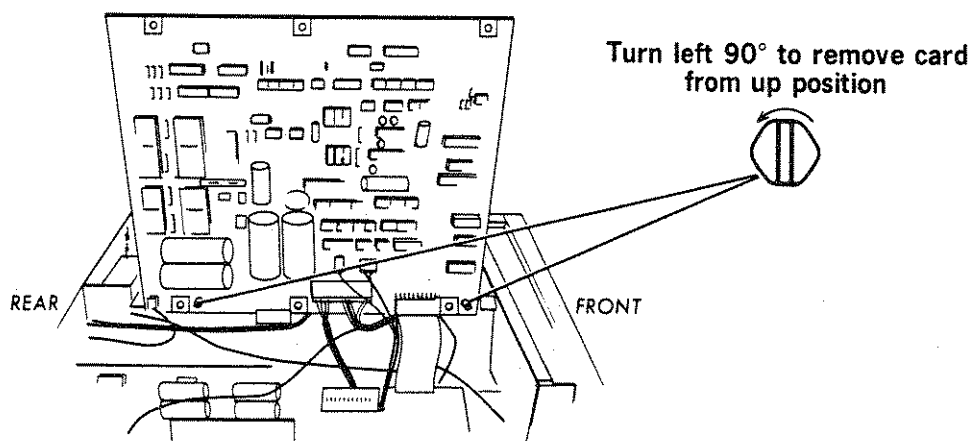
Disconnecting the Low Voltage Circuit Assembly from the Supports
